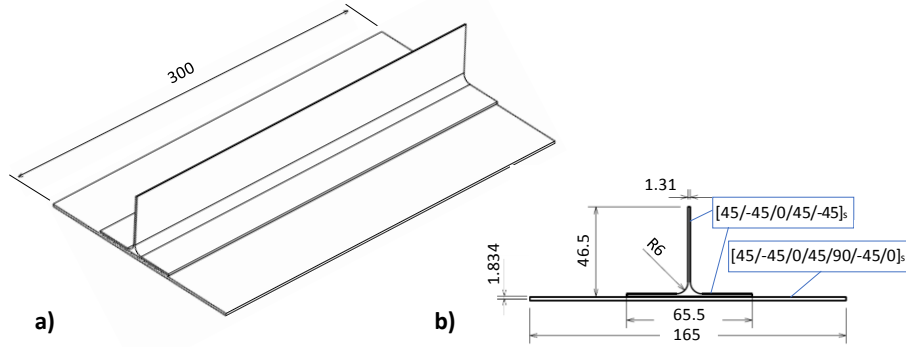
Dimensions of SSP specimen, a) perspective and b) cross-sectional view
